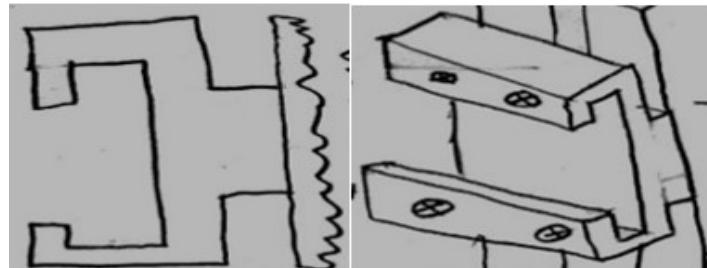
Test Mount Ideation Sketches, Mounting Tabs.
